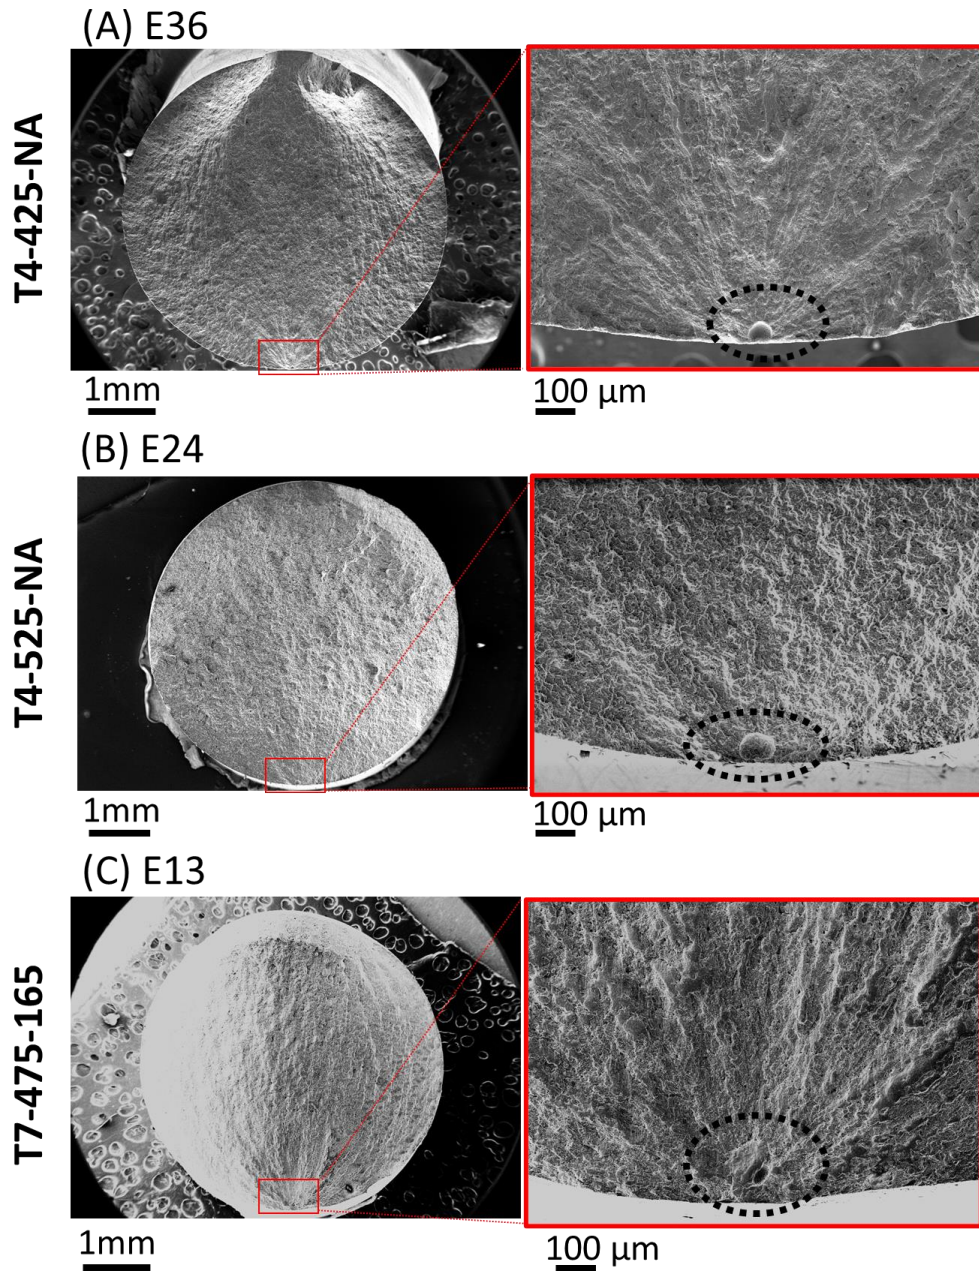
Fatigue fracture surfaces of EOS L-PBF AlSi10Mg specimens tested in the machined surface condition: (A) T4-425-NA, (B) T4-525-NA, (C) T7-475-165.
